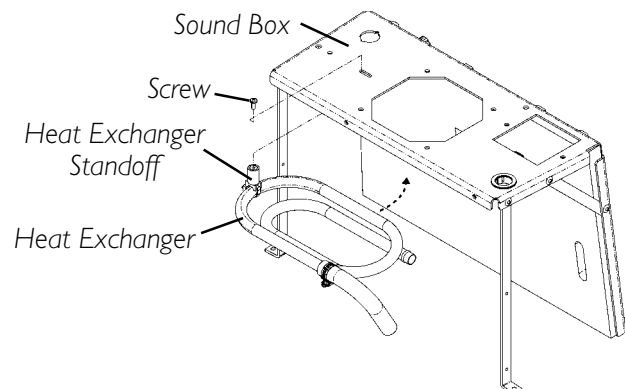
CLEANING THE HEAT EXCHANGER
